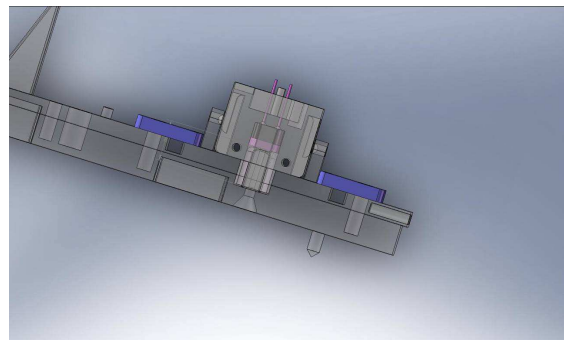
Partial view of a SMRD scintillator counter endcap with the optical connector housing a MPPC and a mini PCB.
